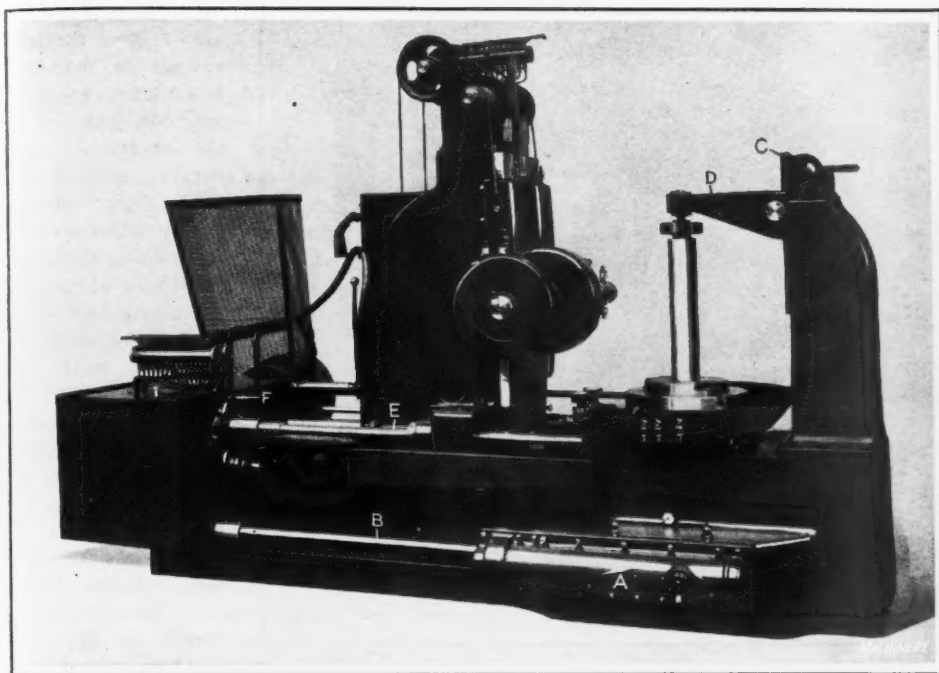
Rear View of the Automatic Gear-hobbing Machine shown in Fig. 1
